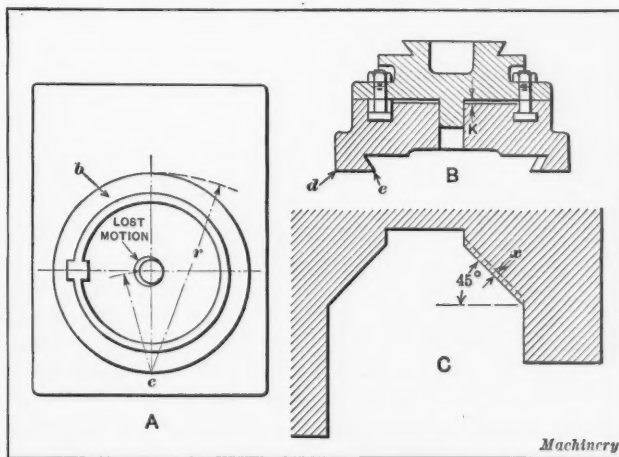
(A and B) Diagrams illustrating Points on fitting Swivel Base. (C) Section of Carriage Bearing Surface
